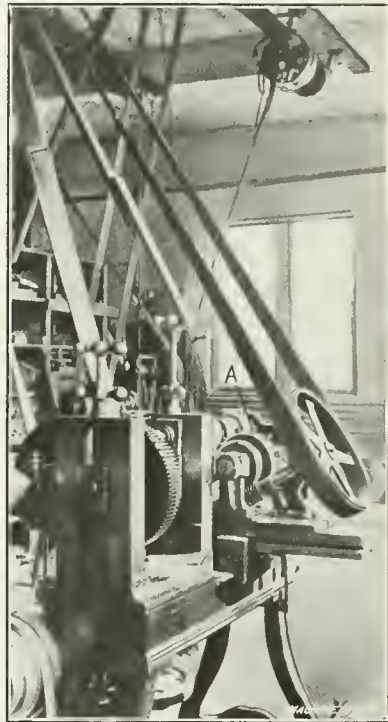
Lincoln Miller equipped with Special Device for Milling the Blades
